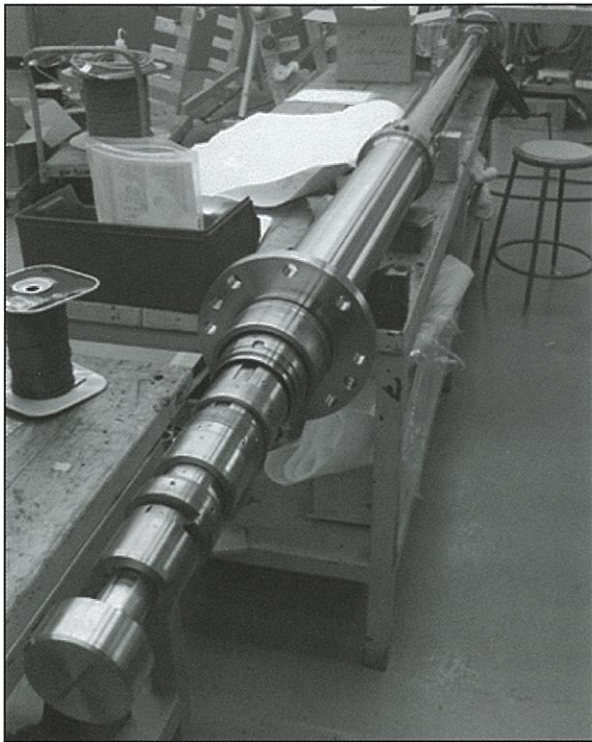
Tool mechanism liner, support sleeve and ram assembly.
